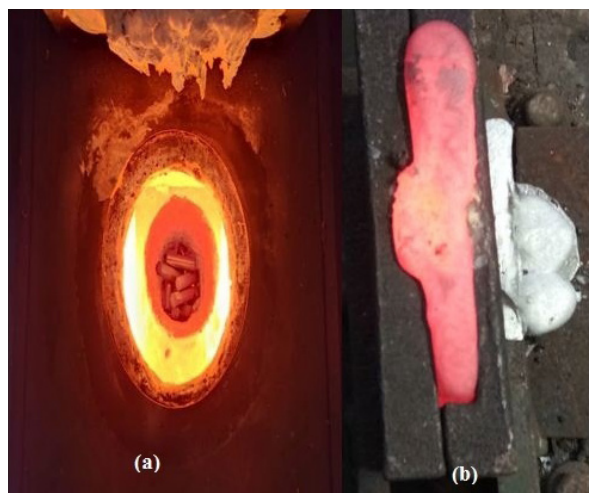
Friction stir process; a) casting furnace, and b) casting die with molten CMC
